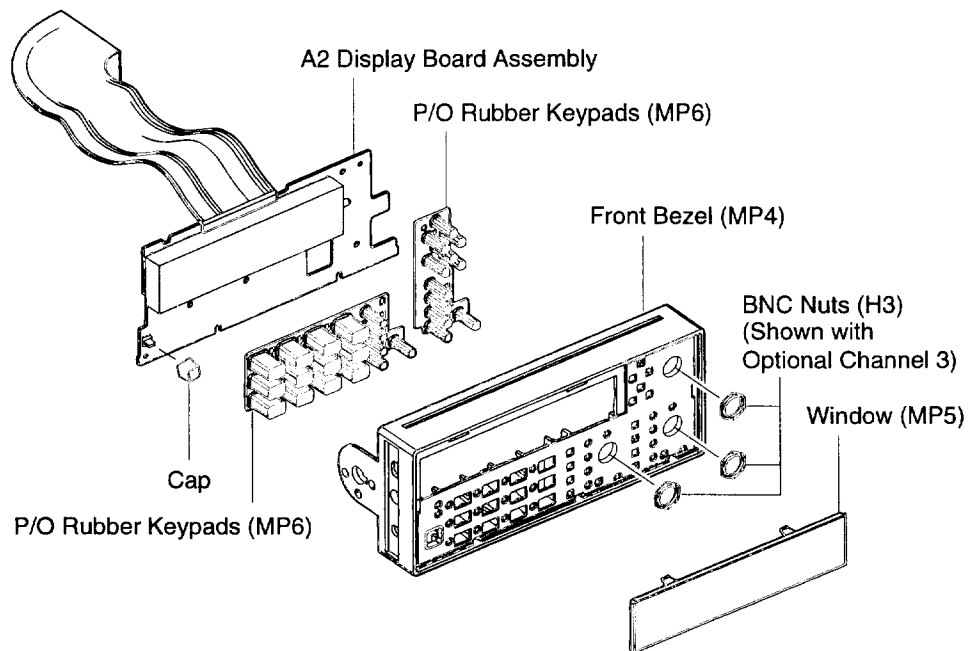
A2 Display Board, Keypad, and Window Removal
